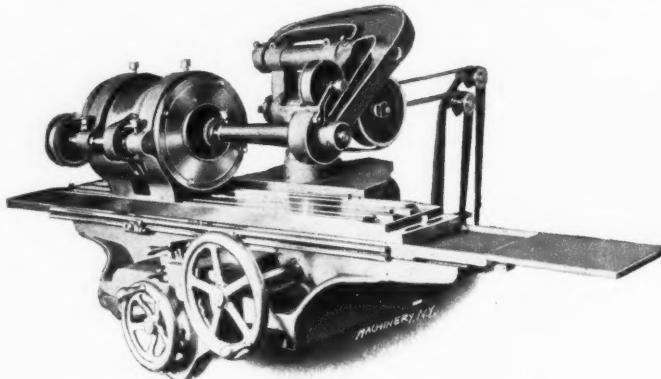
Cylinders in Place in Hollow Spindle Attachment and Grinding in Progress.
